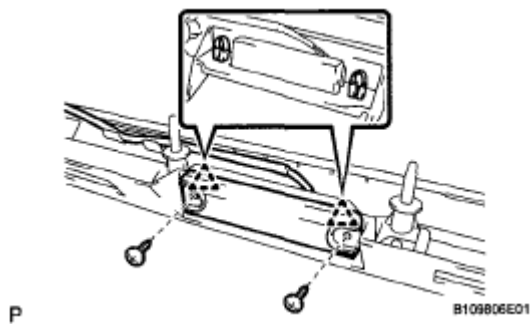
Identifying Back Door Opener Switch Assembly Screws
